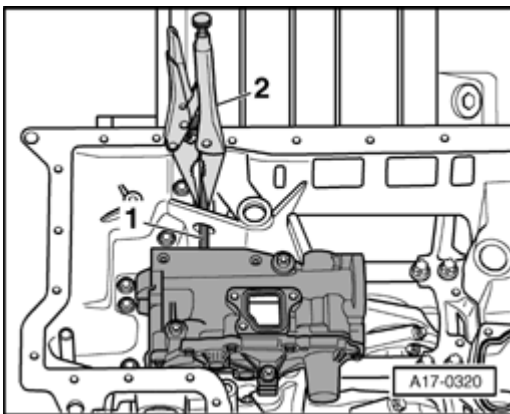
Unlocking Gripping Pliers And Letting Drive Shaft Glide Into Oil Pump
